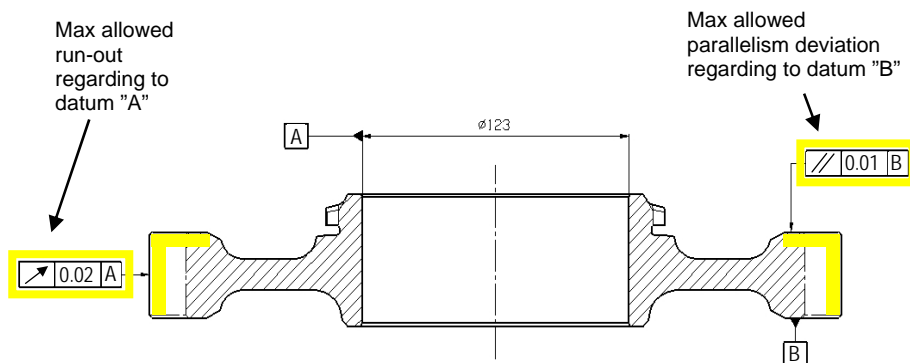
Example showing features on a gearwheel that are governed by typical geometrical requirements. A: Run-out ; B: Parallelism
